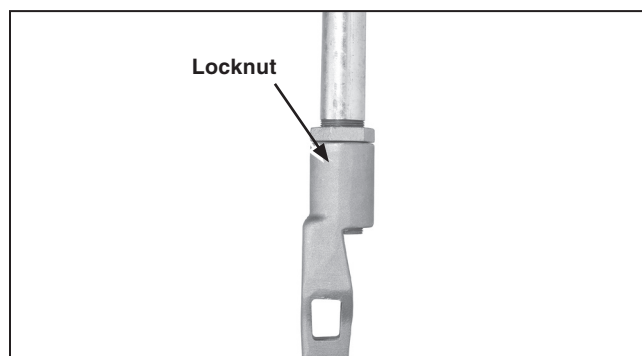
Installing the lowest operating pipe section into the operating handle assembly.
